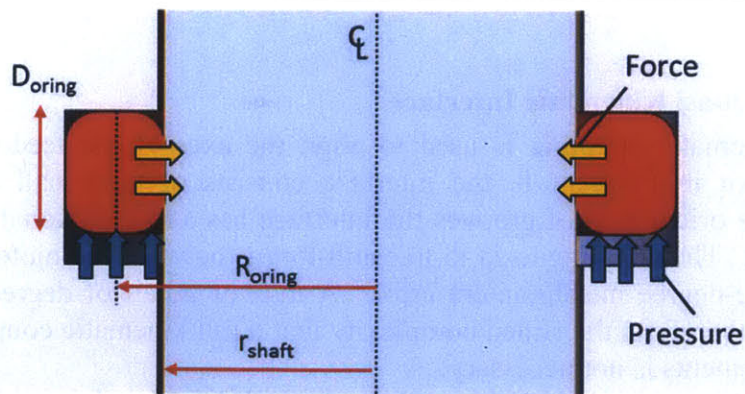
Dynamic seal with a known back pressure pushing against the O-ring seal, which imparts a force on the shaft that reduces the torque potential
